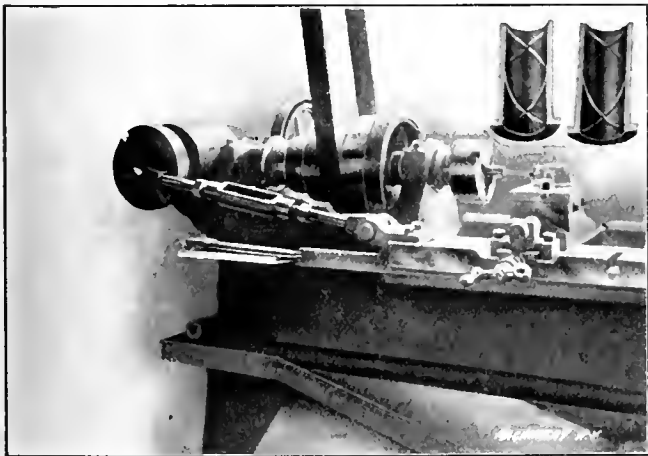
Machine for Grooving the Inside of Brass Bushings, and Sample of the Work Done.
